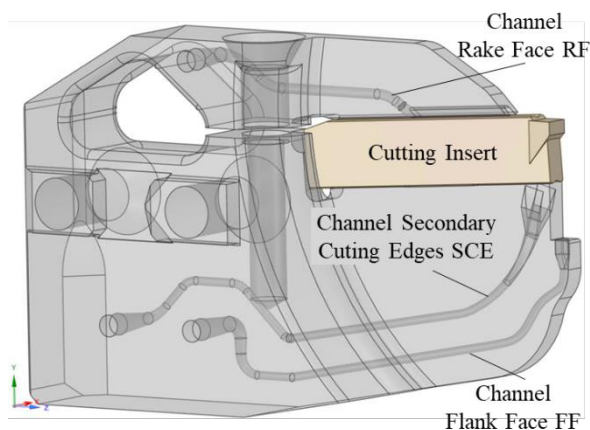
The investigated cutting tool with the three channels RF, FF and SCE
